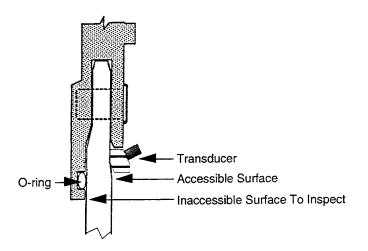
Sketch of a solid rocket motor joint region. Corrosion was found on destacked hardware in the vicinity of the O-ring sealing surface.
